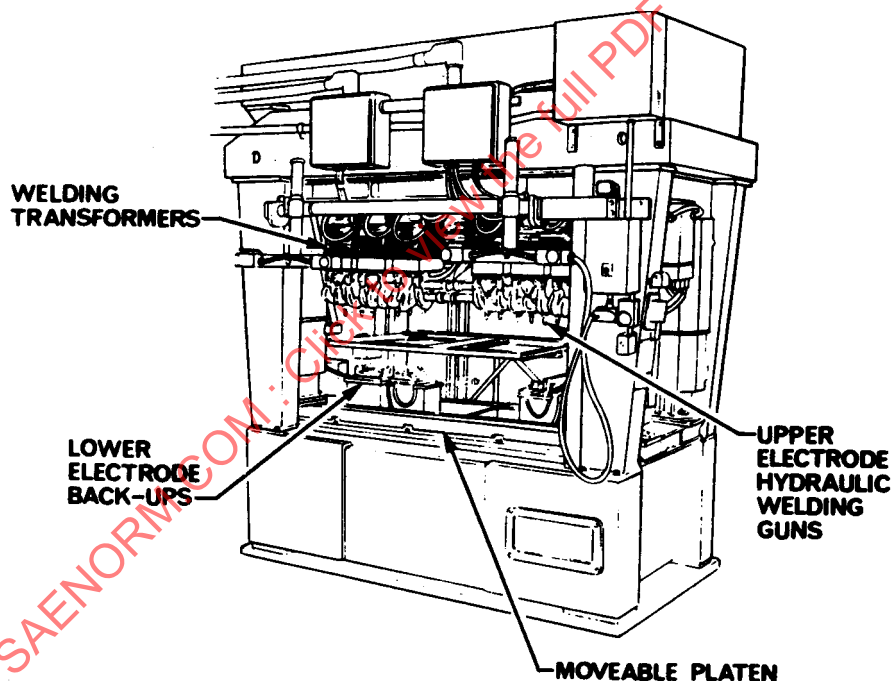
MULTIPLE ELECTRODE PRESS WELDING MACHINE
